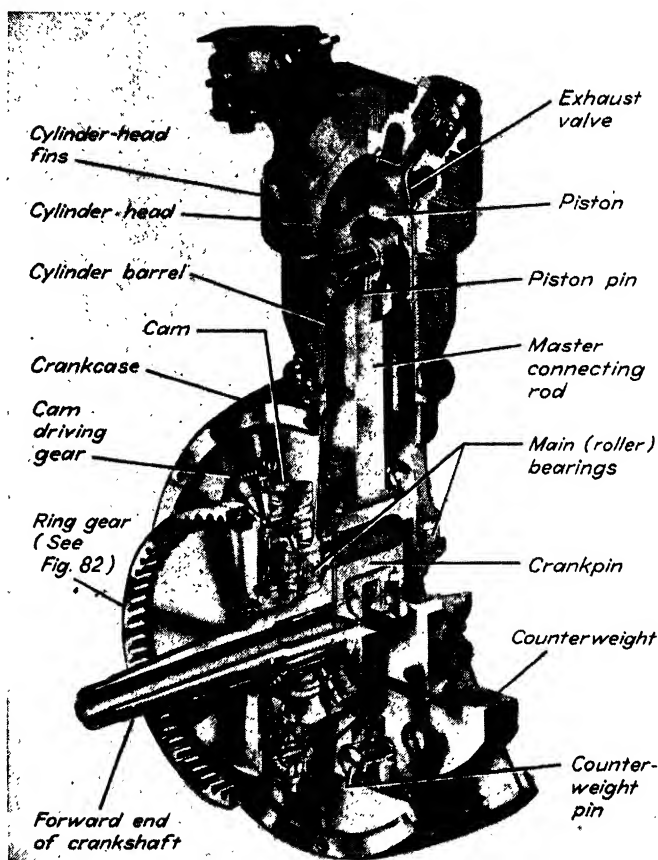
Cutaway section through No. 1 cylinder of Wright Cyclone engine. (Propeller reduction gear and supercharger sections omitted.) (Wright Aeronautical Corporation.)
